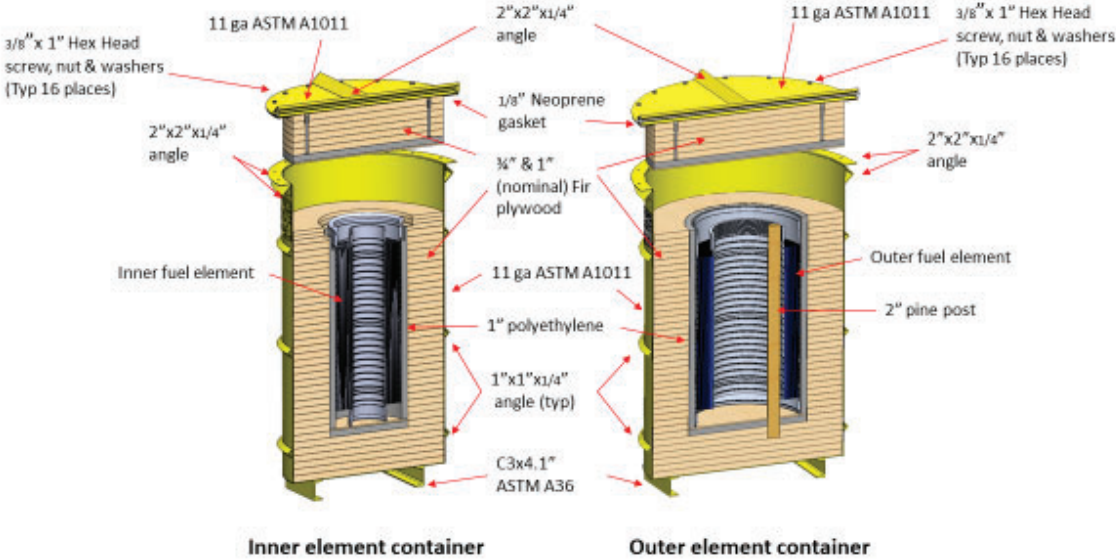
5797 Inner and Outer HFIR Unirradiated Fuel Element Shipping Container Cross Sections
